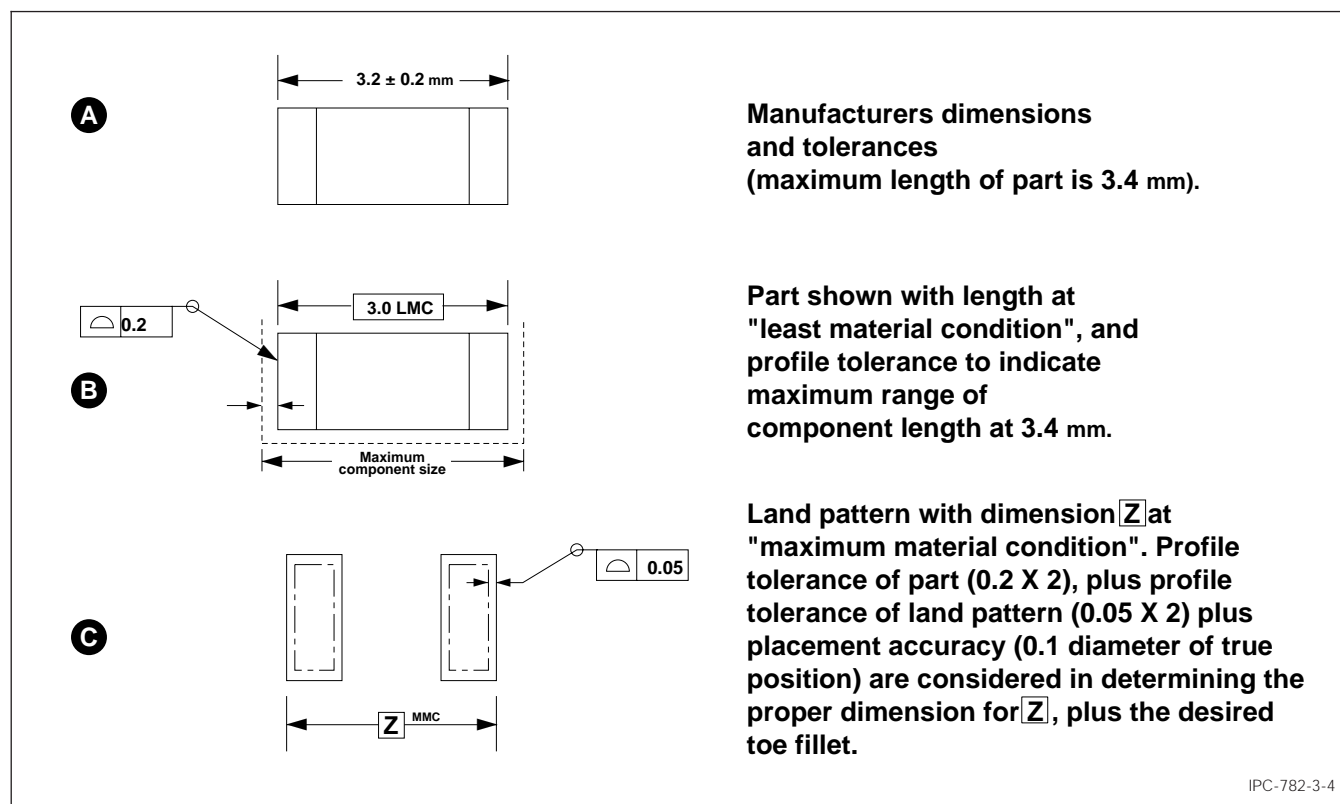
Example of C1206 capacitor dimensioning for optimum solder fillet conditions
